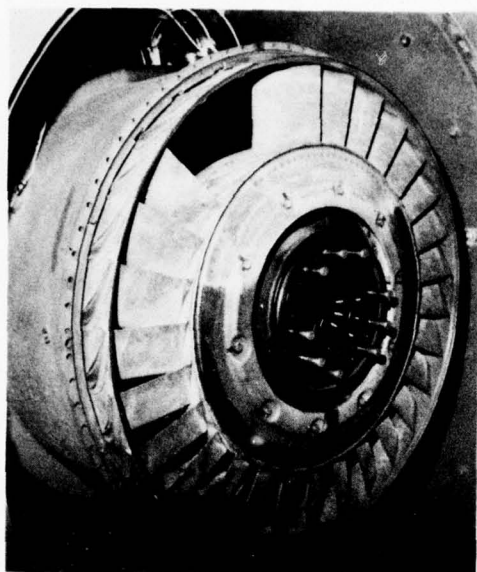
Implanted "Turbine Guide Vane Damage", 3 vanes removed
